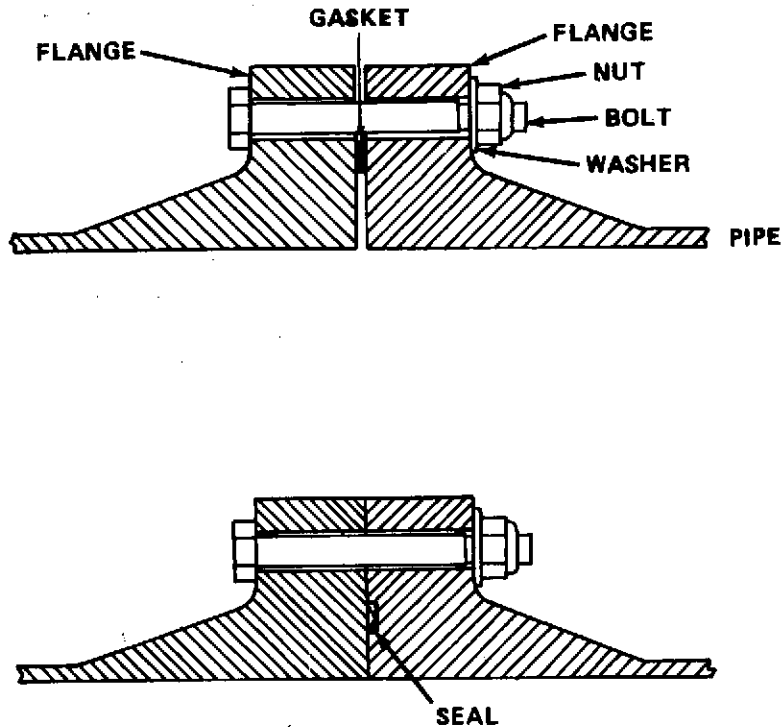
BOLTED SEPARABLE CONNECTOR
